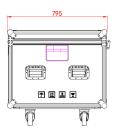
Jade Half Panel Flight Case Dimensions (Unit: mm)
